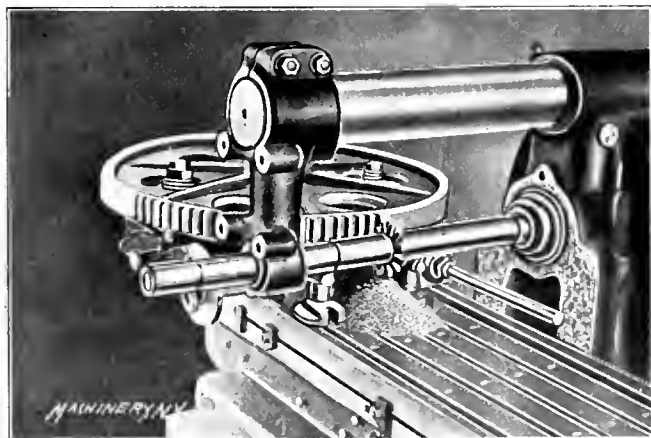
Using the Circular Milling Attachment as an Indexing Device for Cutting a Large Gear.
